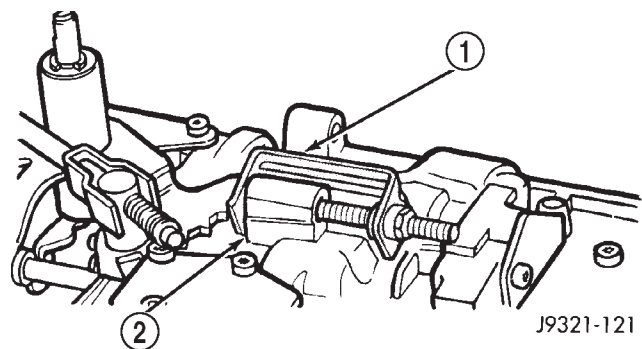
Securing Detent Ball And Spring With Retainer Tool
